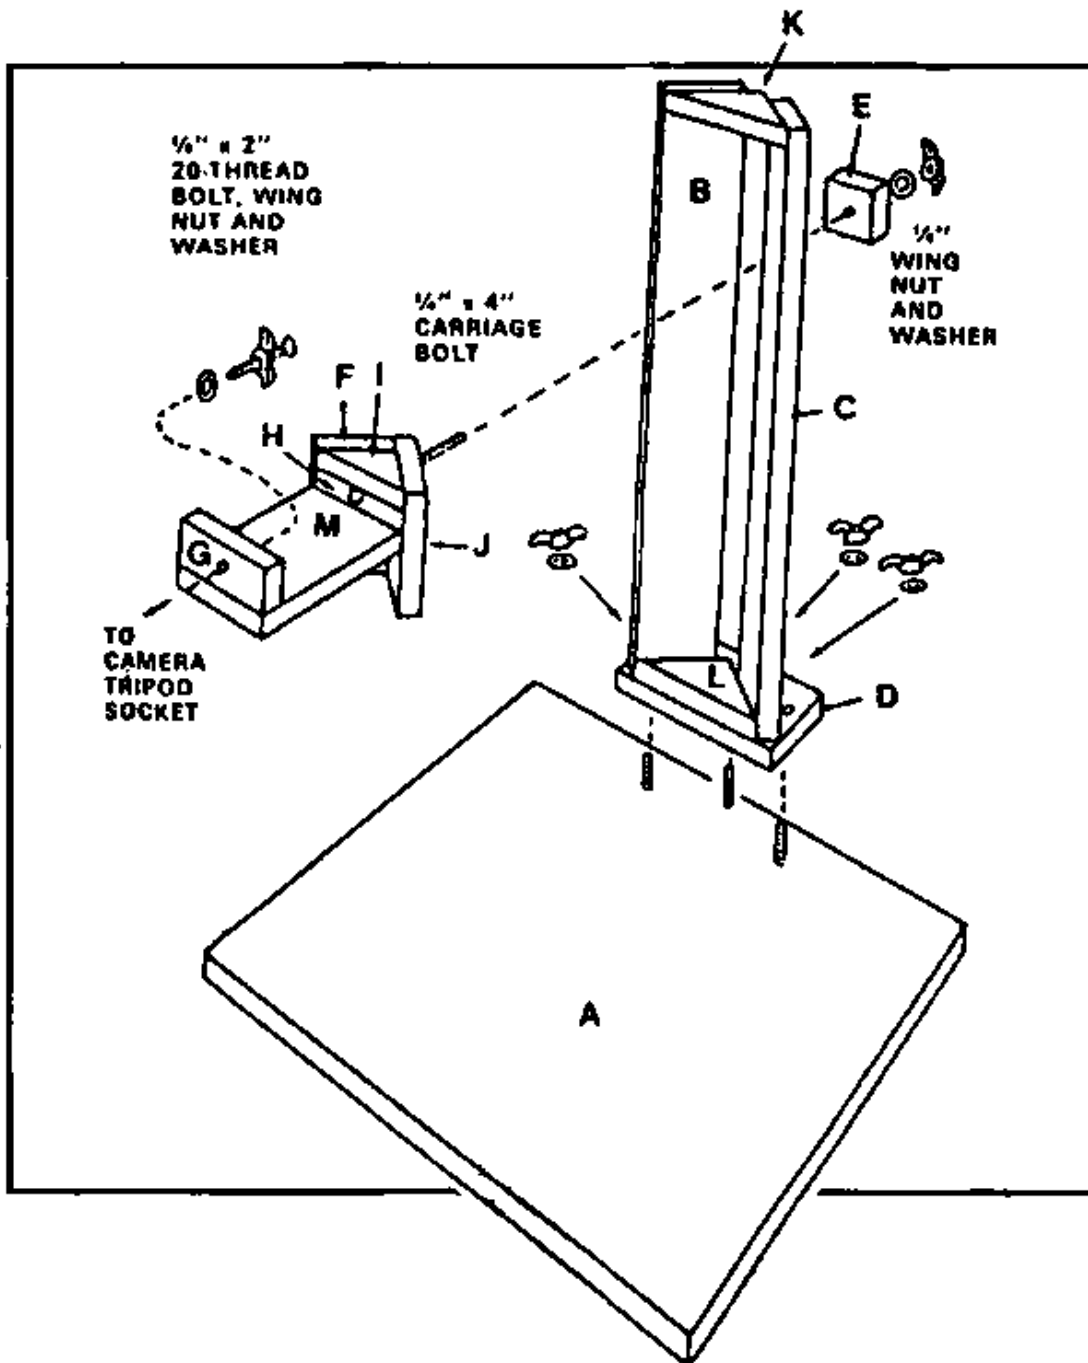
The assembled copying stand is shown partially unpainted so you can more easily identify the elements that can be disassembled for portability; the finished stand should be completely painted matte black.
